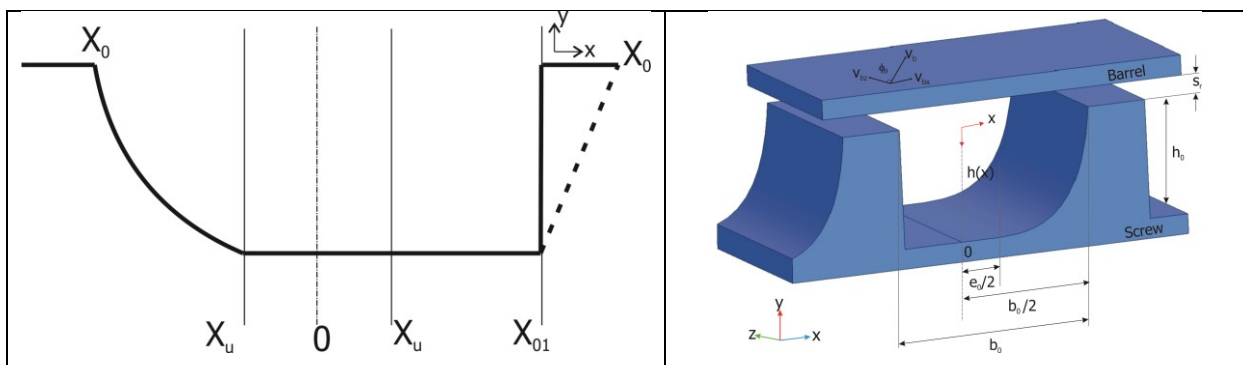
Cross sectional view of shear edge screw channel geometry
